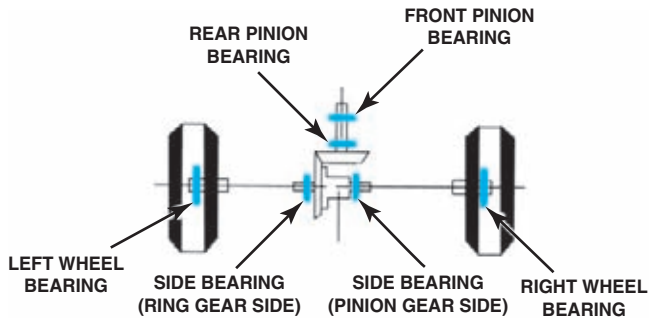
A faulty rear axle bearing can usually be located by listening and feeling next to the bearing as the vehicle is operated on a hoist or stands. Be careful when doing this because of the rotating shafts and wheels. (Courtesy of DaimlerChrysler Corporation)
